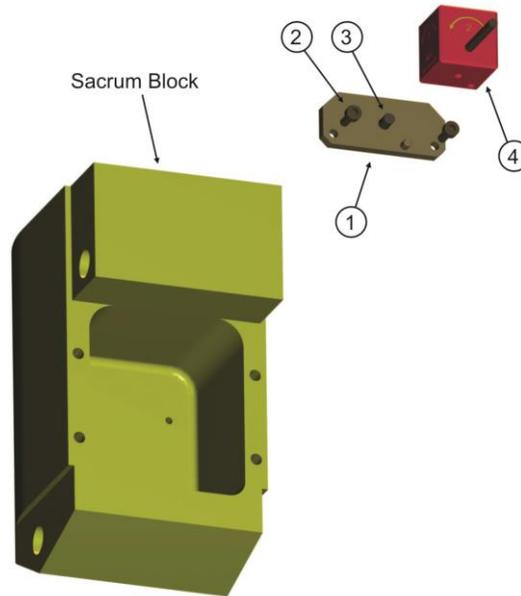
Pelvis tilt sensor and mounting bracket assembly
